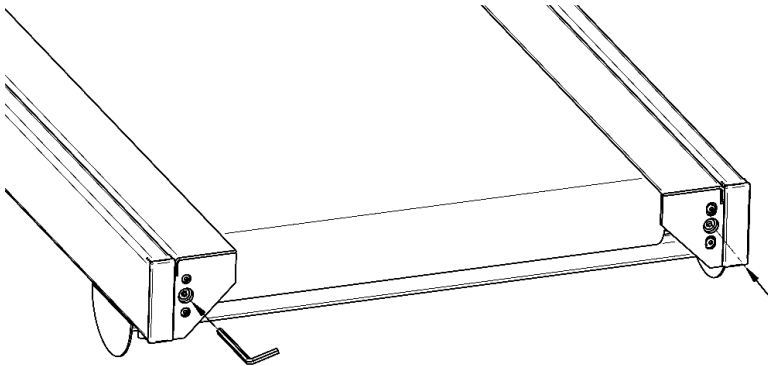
Tension screw holes of the passive roller on the back of the treadmill
